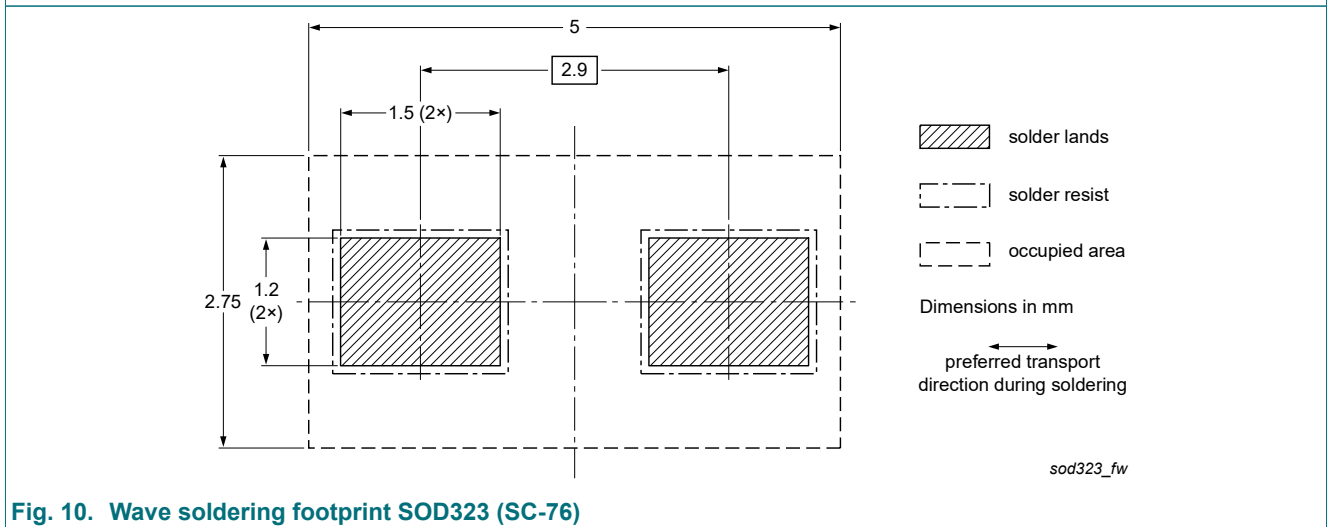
Wave soldering footprint SOD323 (SC-76)
